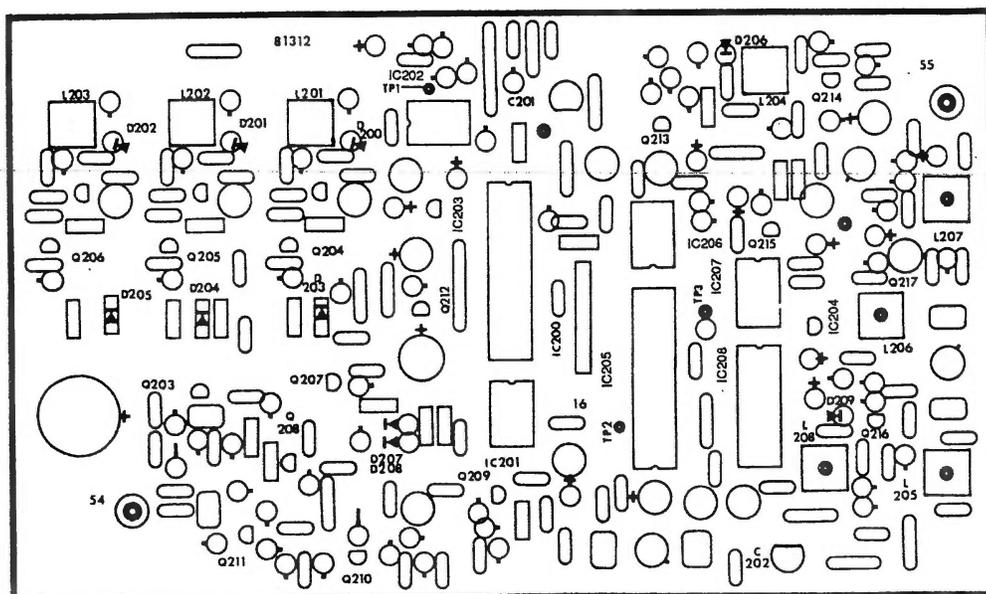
81389 PLL UNIT COMPONENT LAYOUT
